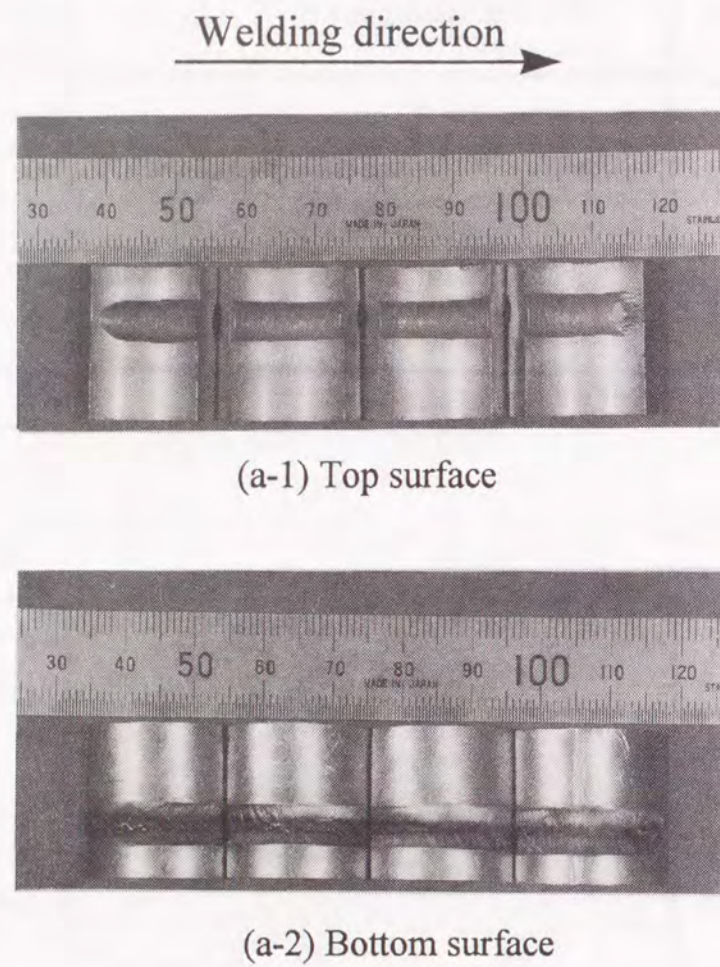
Appearance of top and bottom surface after welding on aluminum pipe
